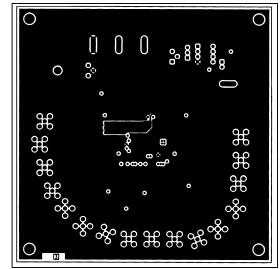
MAX555 EV Kit PC Board Layout—Layer 3 (Power Layer)
